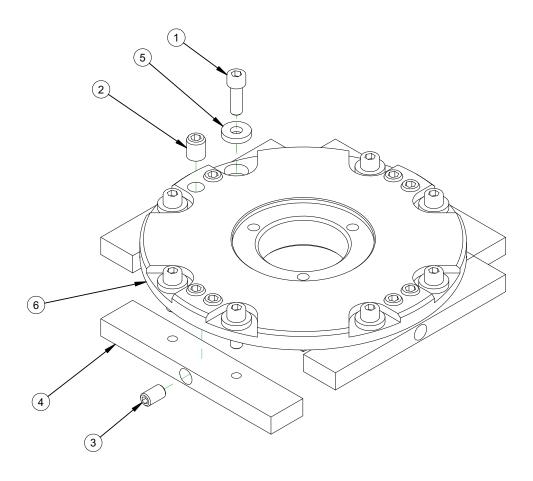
ID CHUCK ASSEMBLY 4 LEG 12-57" (305-1,448 MM) (P/N 81971)
